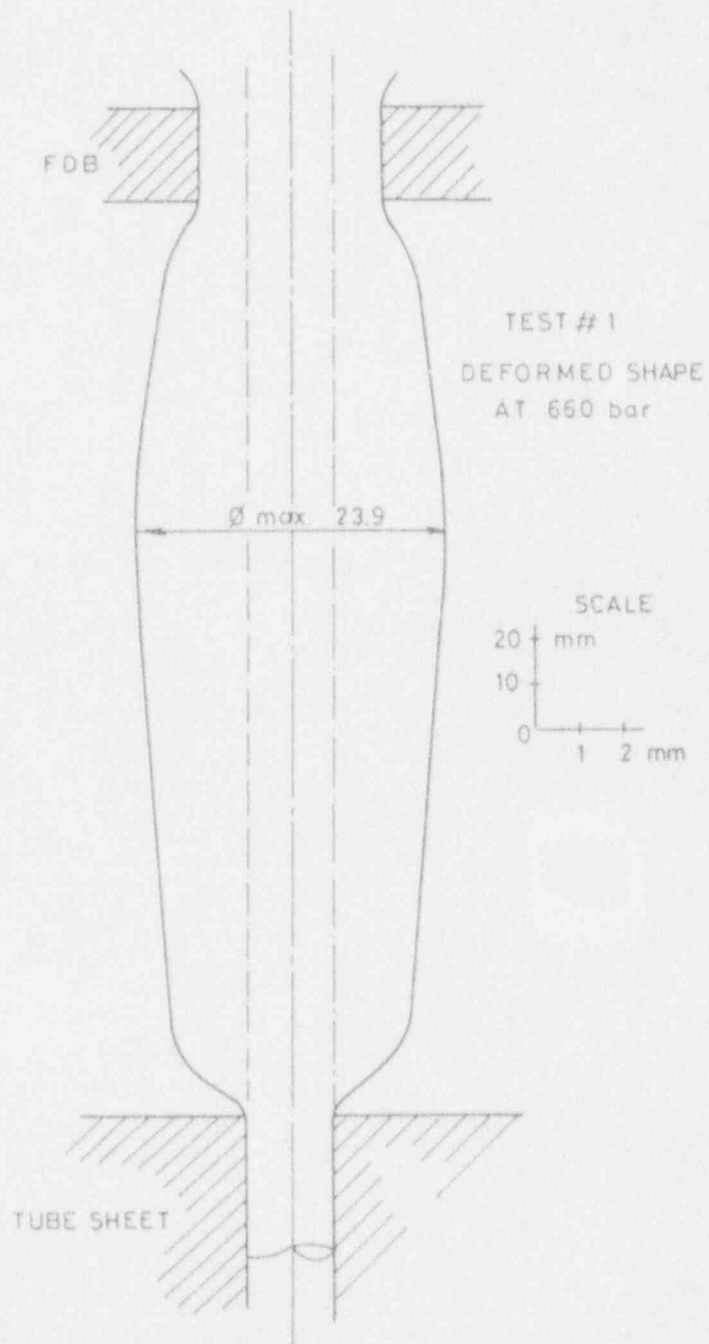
(d) Unflawed test specimen Inconel 3/4" OD
